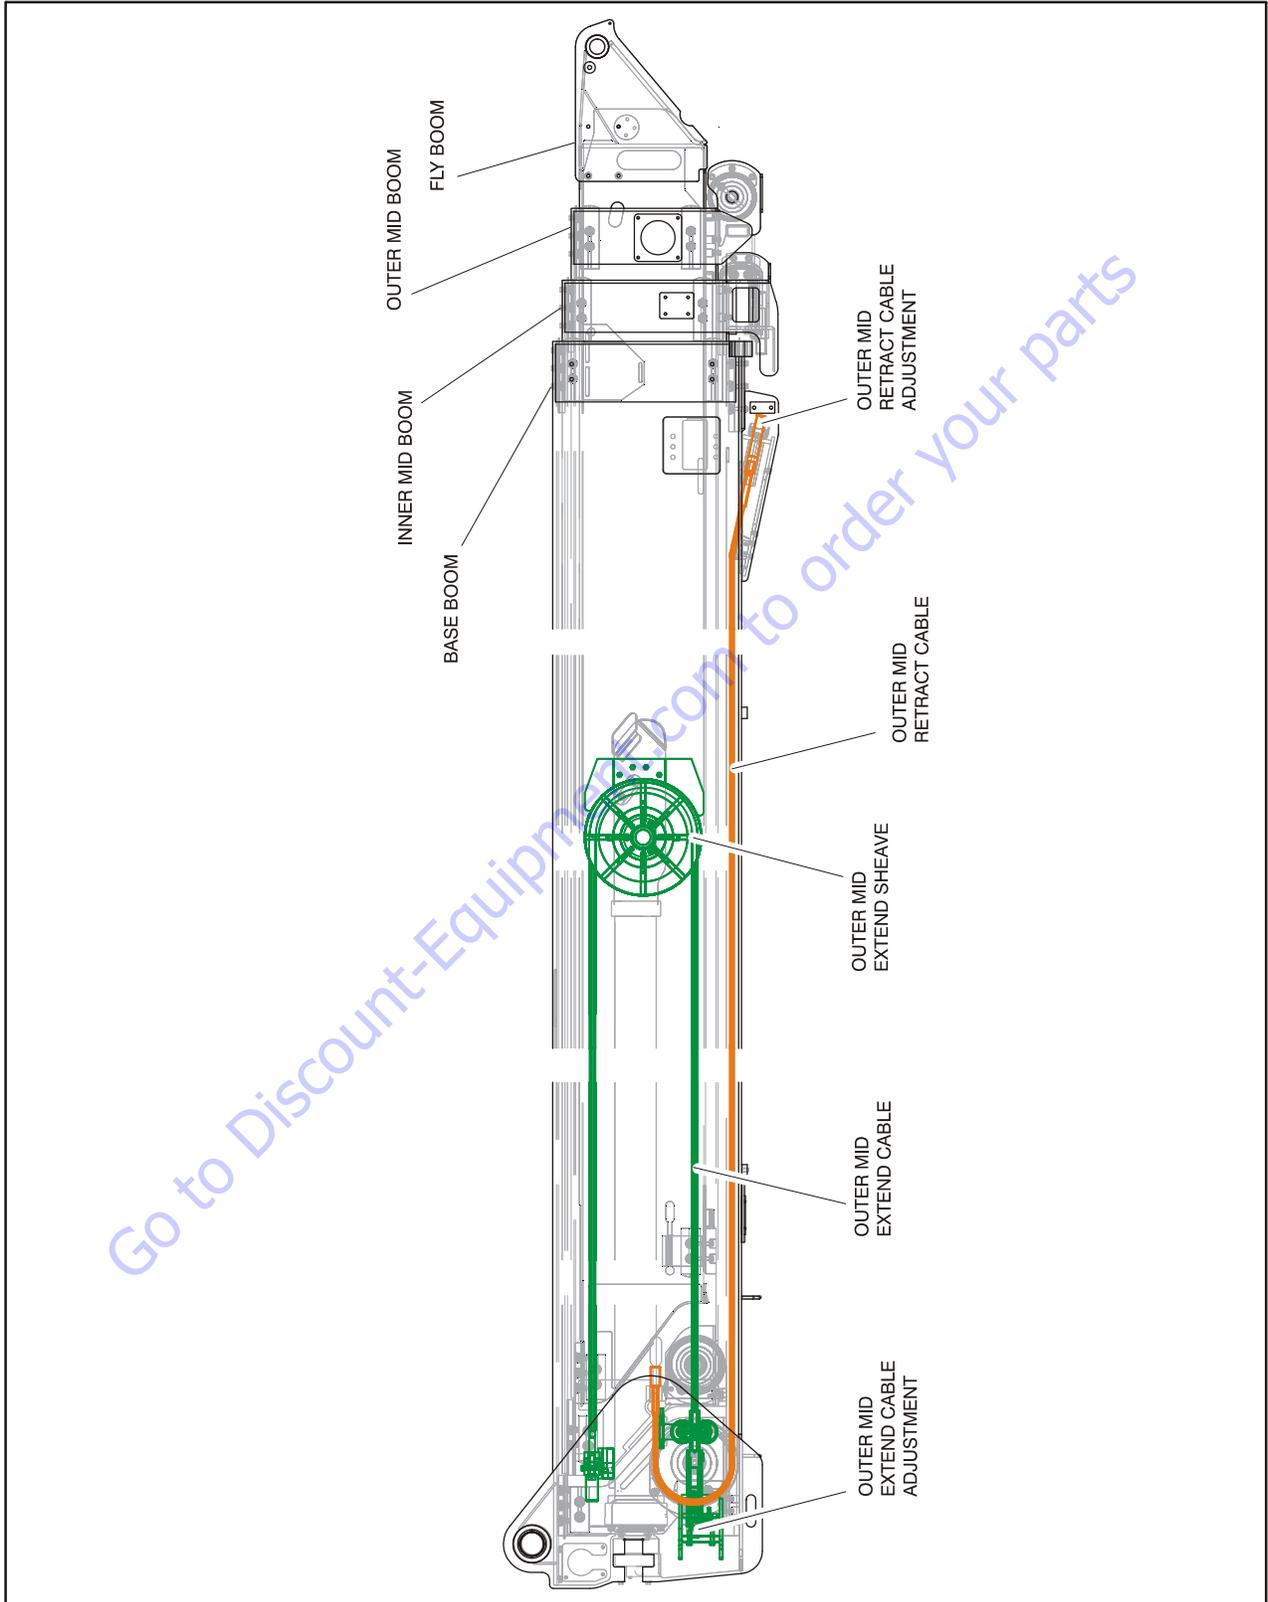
Outer Mid Boom Extend/Retract Cables
